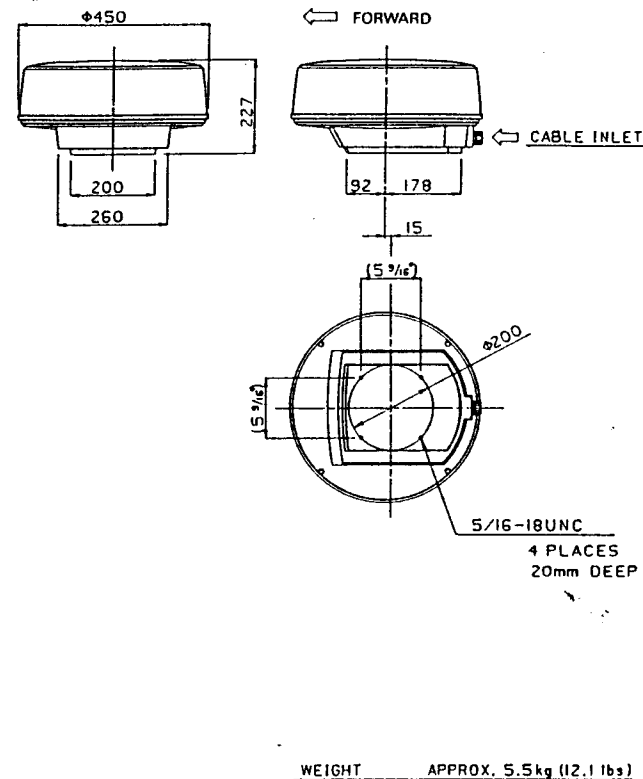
OUTLINE DRAWING OF SCANNER UNIT
